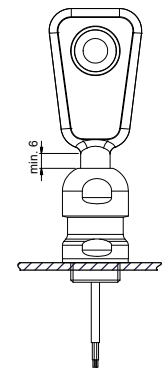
Mounting of pms sensor with sensor screw connection BF-pms/A1
